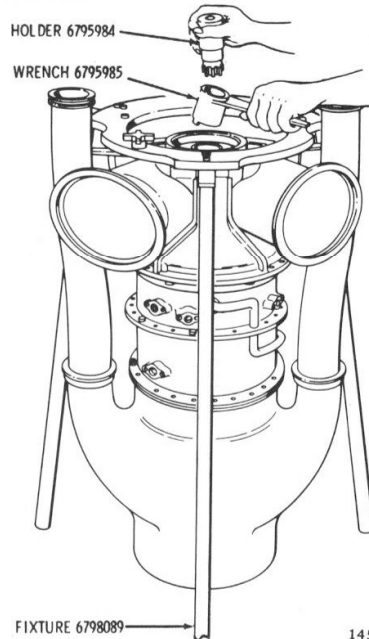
Installing Power Turbine Shaft Spanner Nut
